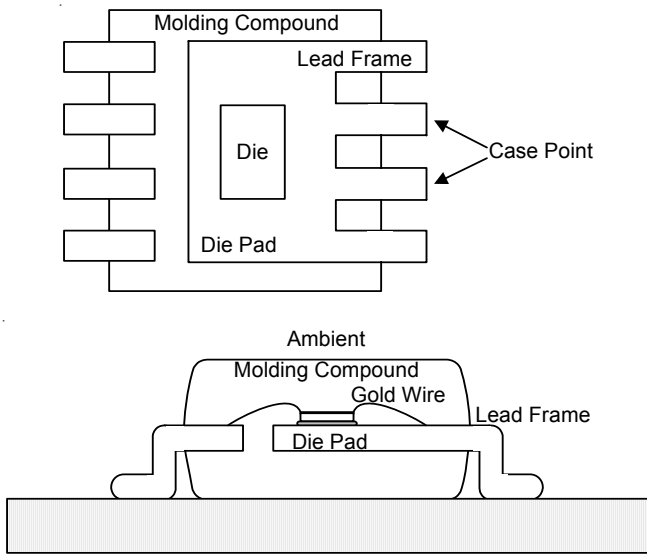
The Package Section Drawing of RT9173/A SOP-8 Package
